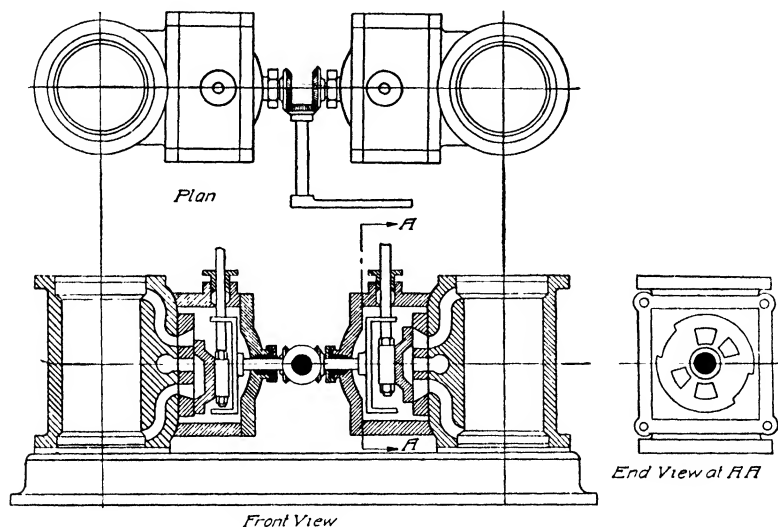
Front Section, Plan, and End View of Miller Steam Valve
